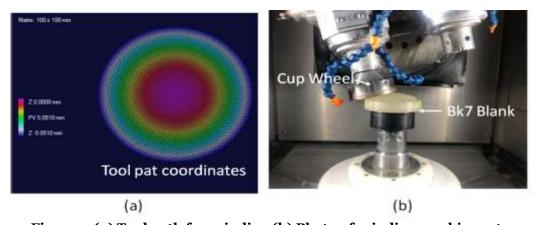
(a) Tool path for grinding (b) Photo of grinding machine setup
